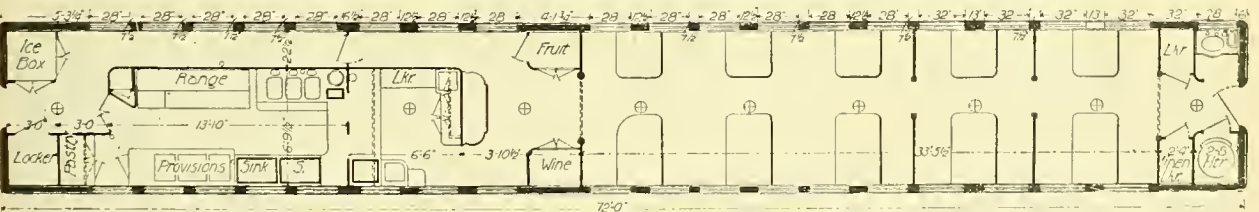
SECTIONAL PLAN OF DINING CAR, FERDINAND.
